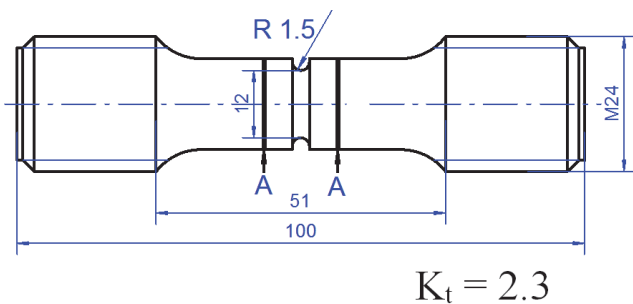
Specimen and dimensions of the used notched specimen (mm).
